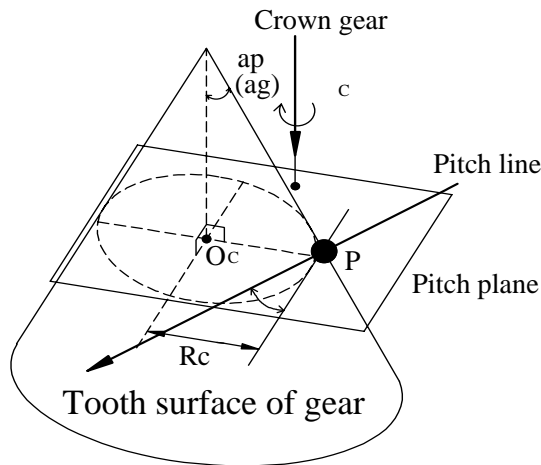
Cone shaped tooth of Crown gear placed on Pitch plane
